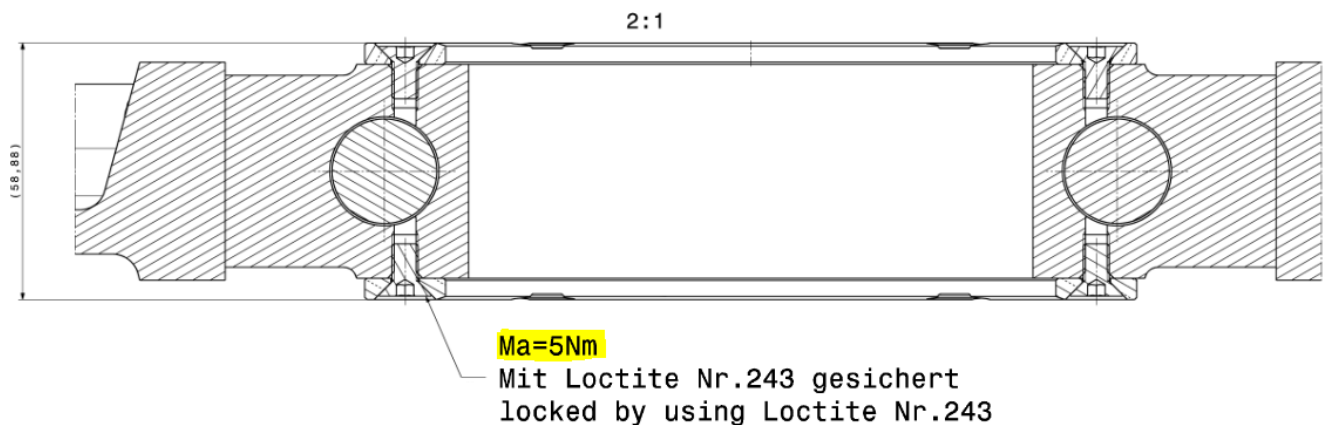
Section through the upper countersunk screw heads in the main bearing cap
